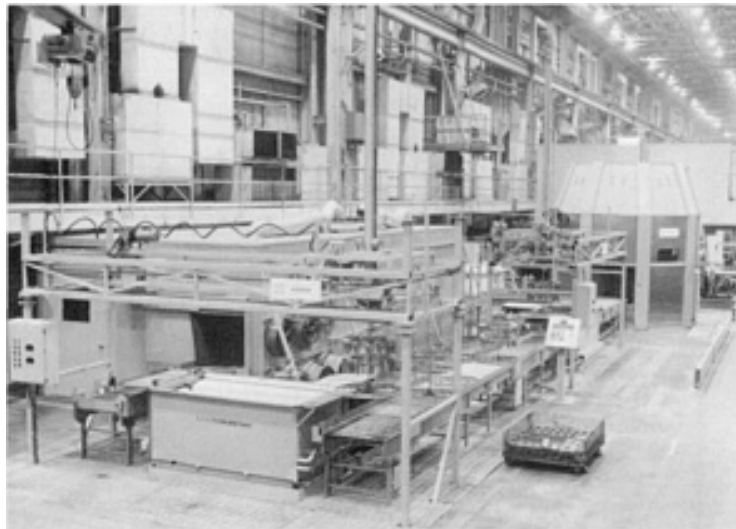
Automated inspection installation for the fluorescent penetrant inspection of large workpieces, such as castings. The installation incorporates a complex roller conveyor system.
